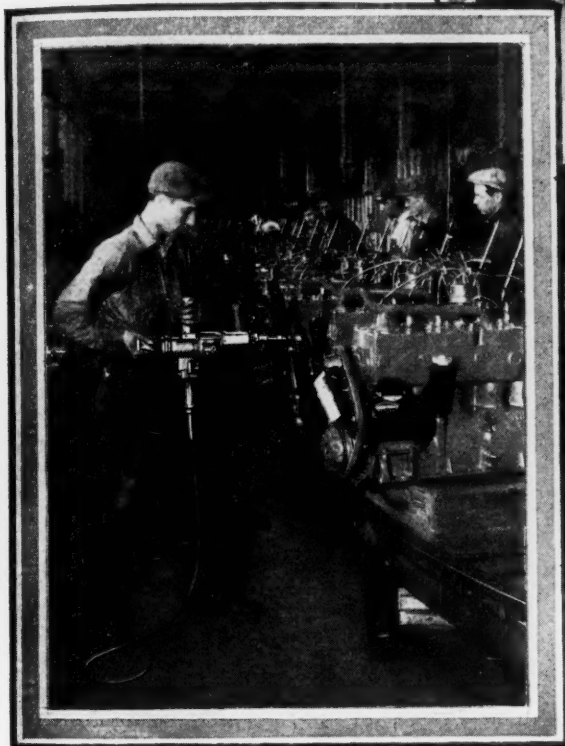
Assembling the Fan to the Drive Shaft by Using an Electric Nut Setter for Driving 5/16-inch Cap-screws
